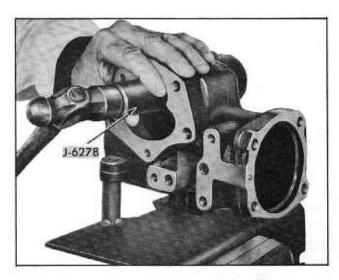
Removing or Replacing Pitman Shaft Bushing
